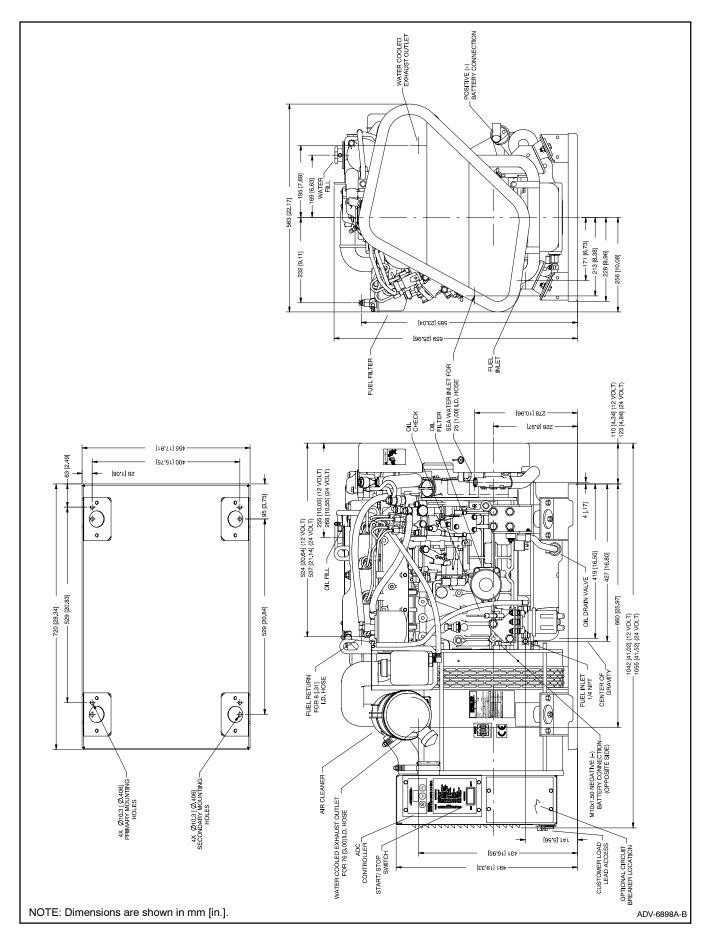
Dimension Drawing, 20EOZD and 17/17.5EFOZD
